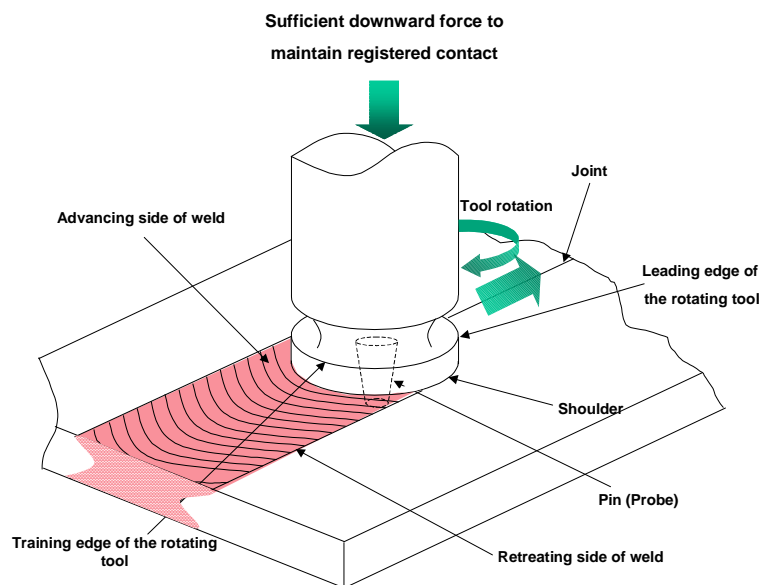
Basic Principle of Friction stir welding
